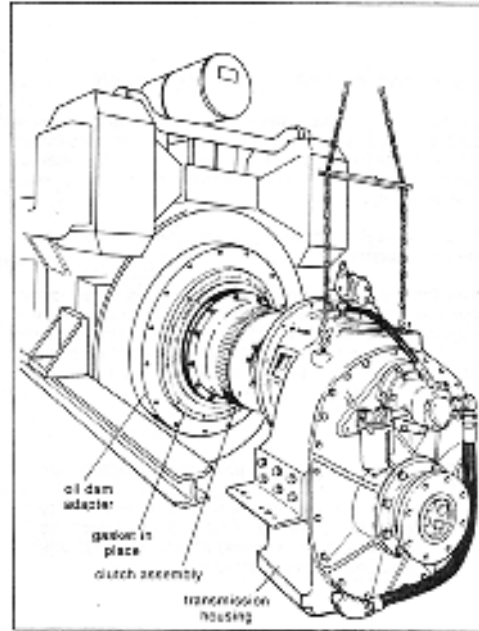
Locating Transmission Housing on Oil Dam Adapter
